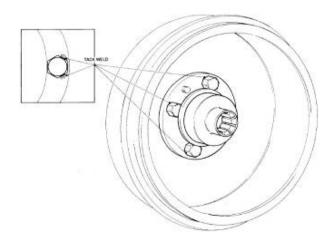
Welding Points For Propeller Shaft Bolts
